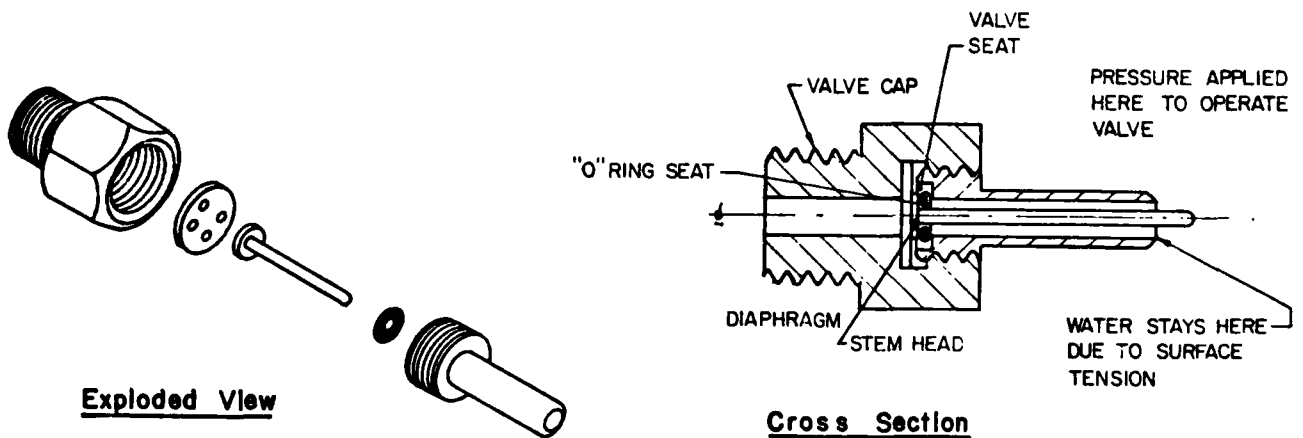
Exploded and cross sectional views of the pivoting stem drinking valve.
